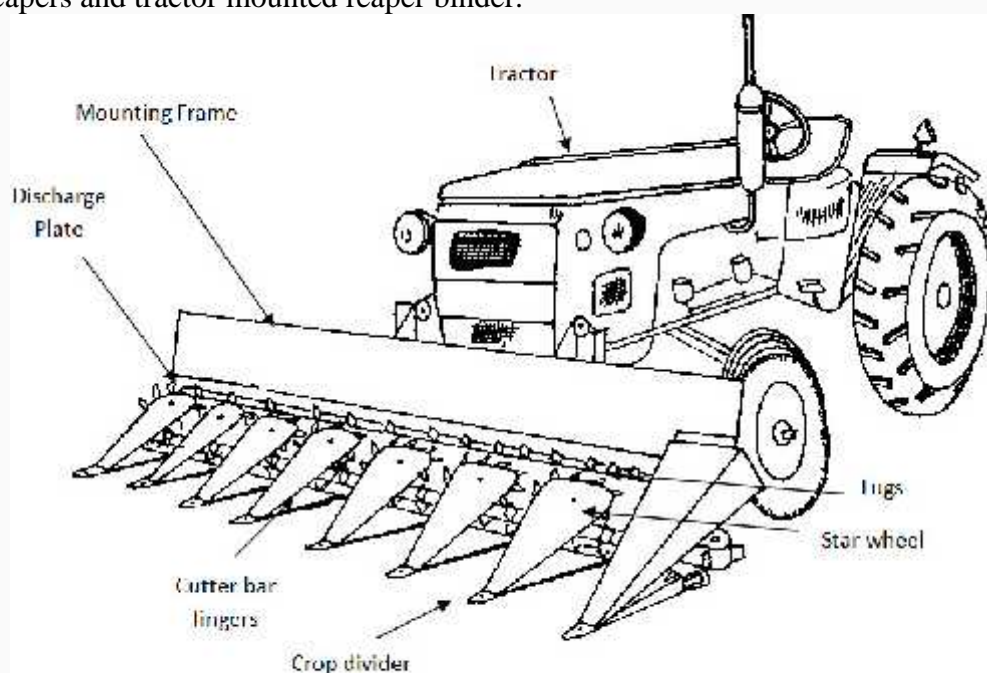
Tractor front mounted vertical conveyer reaper windrower.
